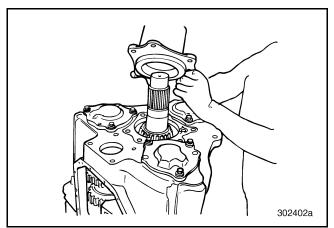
Removing Output Housing, Bearing Cone and Spacer (T313L21/T318L21 Shown)
